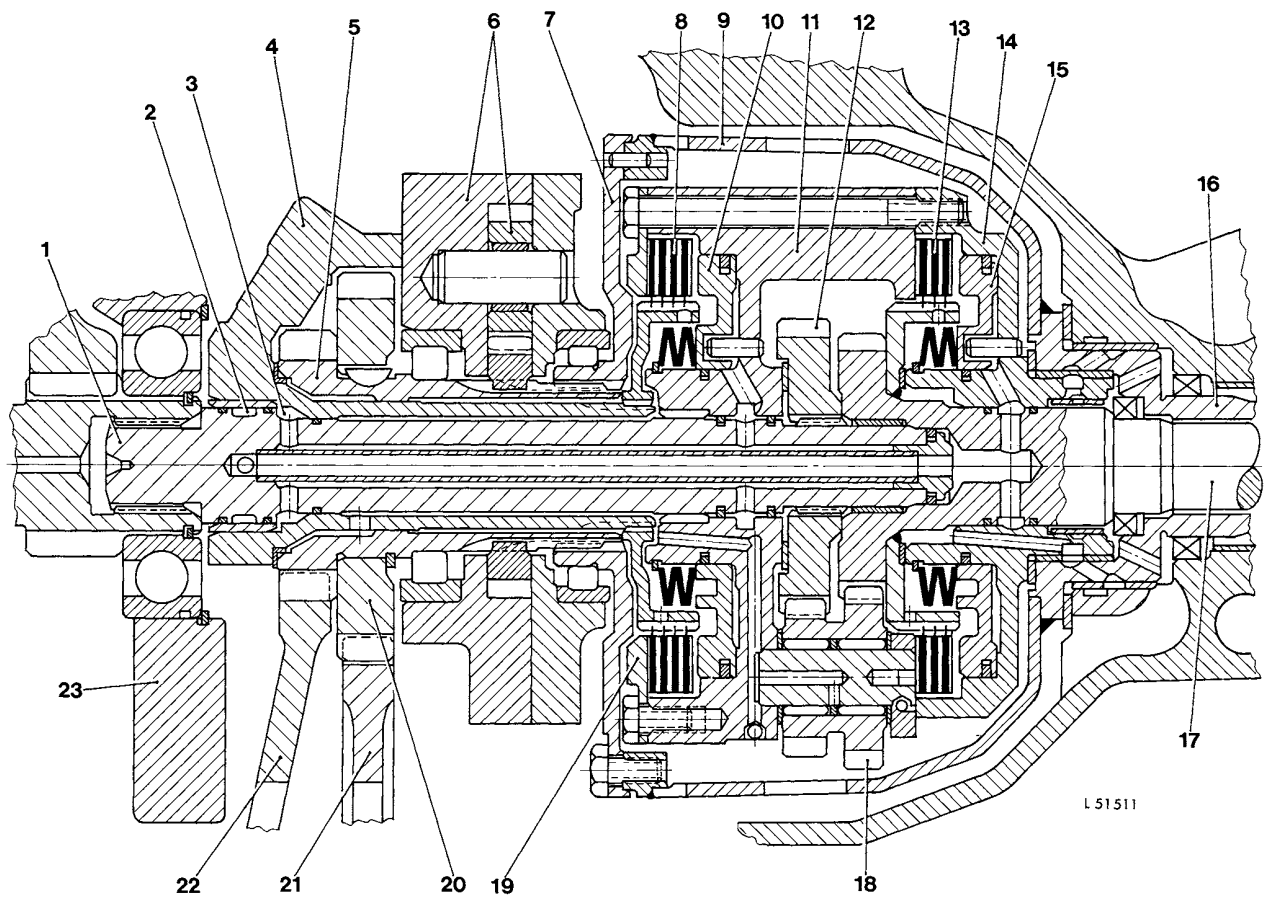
HIGH-LOW Shift Assembly, Sectional View
